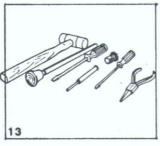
The gun can be disassembled and reassembled by hand with the help of few tools only and in a few minutes.
